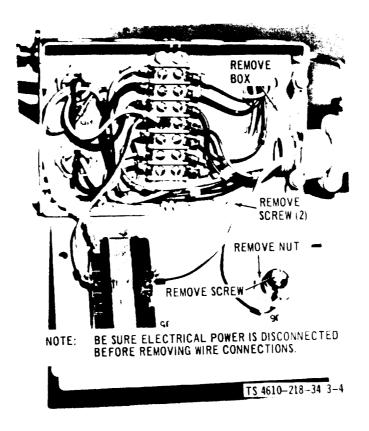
Duplex Receptacle Connector, with cover Removed, Removal and Installation
